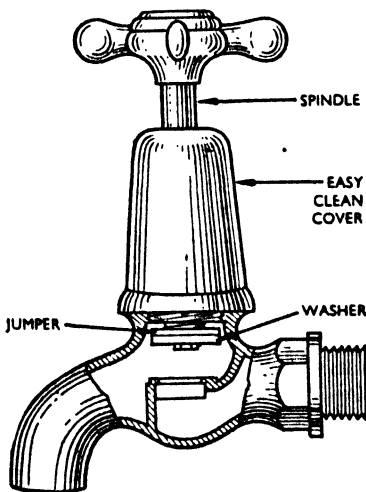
Screwdown valve. The spindle is screwed down until the washer at the end engages on the brass seating.
